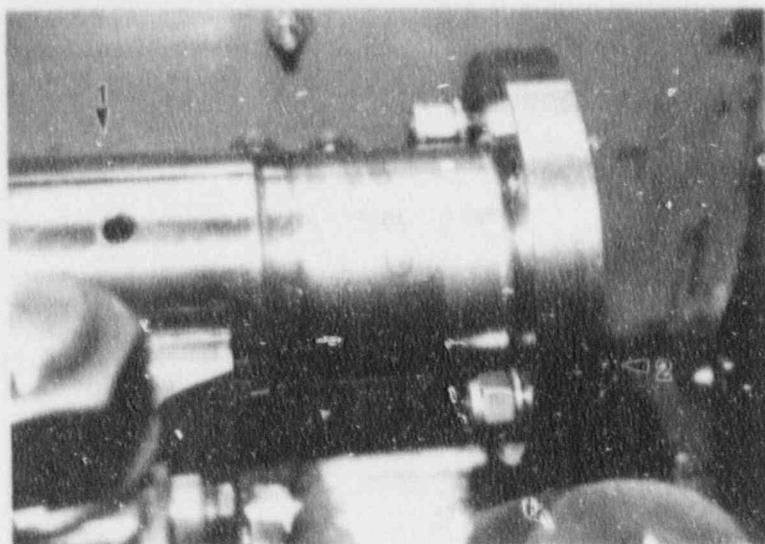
View of the rear end of the left rear camshaft segment. Arrow 1 points to the camshaft bearing surface associated with camshaft bearing block number 1, and arrow 2 points to the broken dowel bolts at the separated camshaft to stubshaft flange connection. The good condition of the camshaft bearing surface for bearing block number 1 supports the accepted failure scenario, where the initiating event was the bearing cap coming loose.
